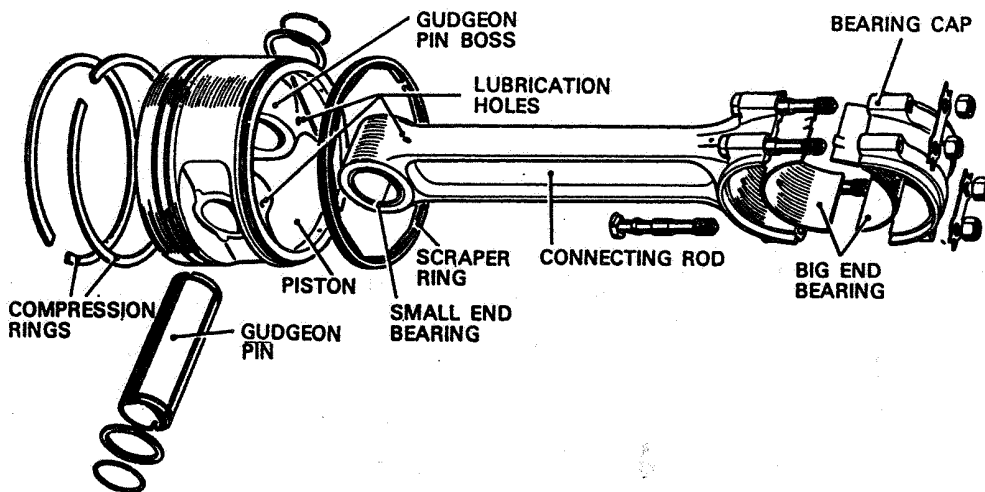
CONNECTING ROD AND PISTON ASSEMBLY
